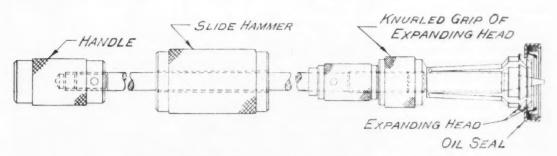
Special puller for removing press-fit seals having motal shells. Expanding head is enlarged by rotating handle, and slide hammer is reciprocated
